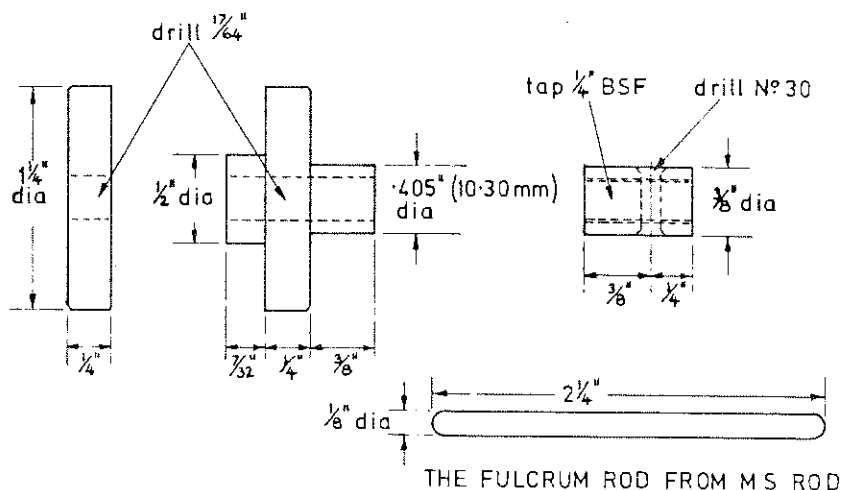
is a drawing of the plate holding flanges, the fulcrum nut and the fulcrum rod, and these items can be seen in fig 4.
